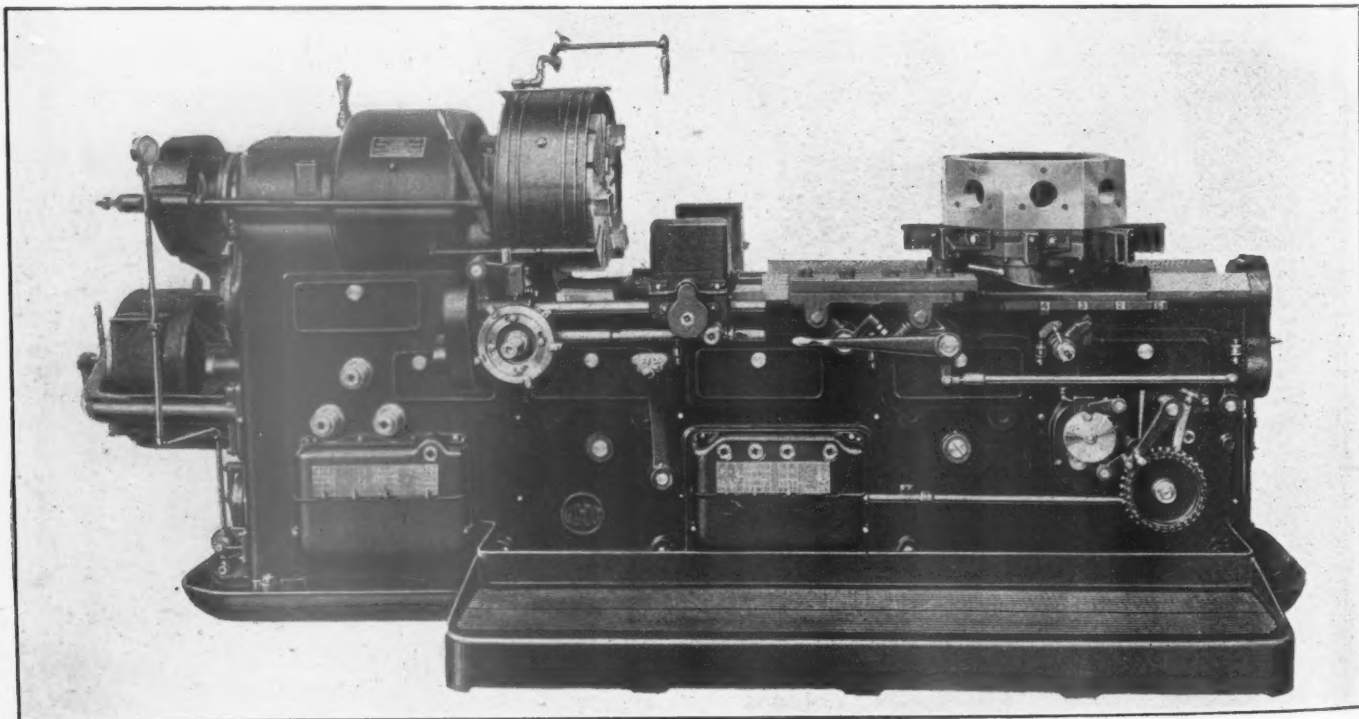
20-in. Gisholt Automatic Turret Lathe
